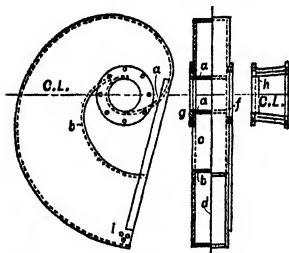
Steel-plate single-spiral feeder (after Hardinge Co.).
